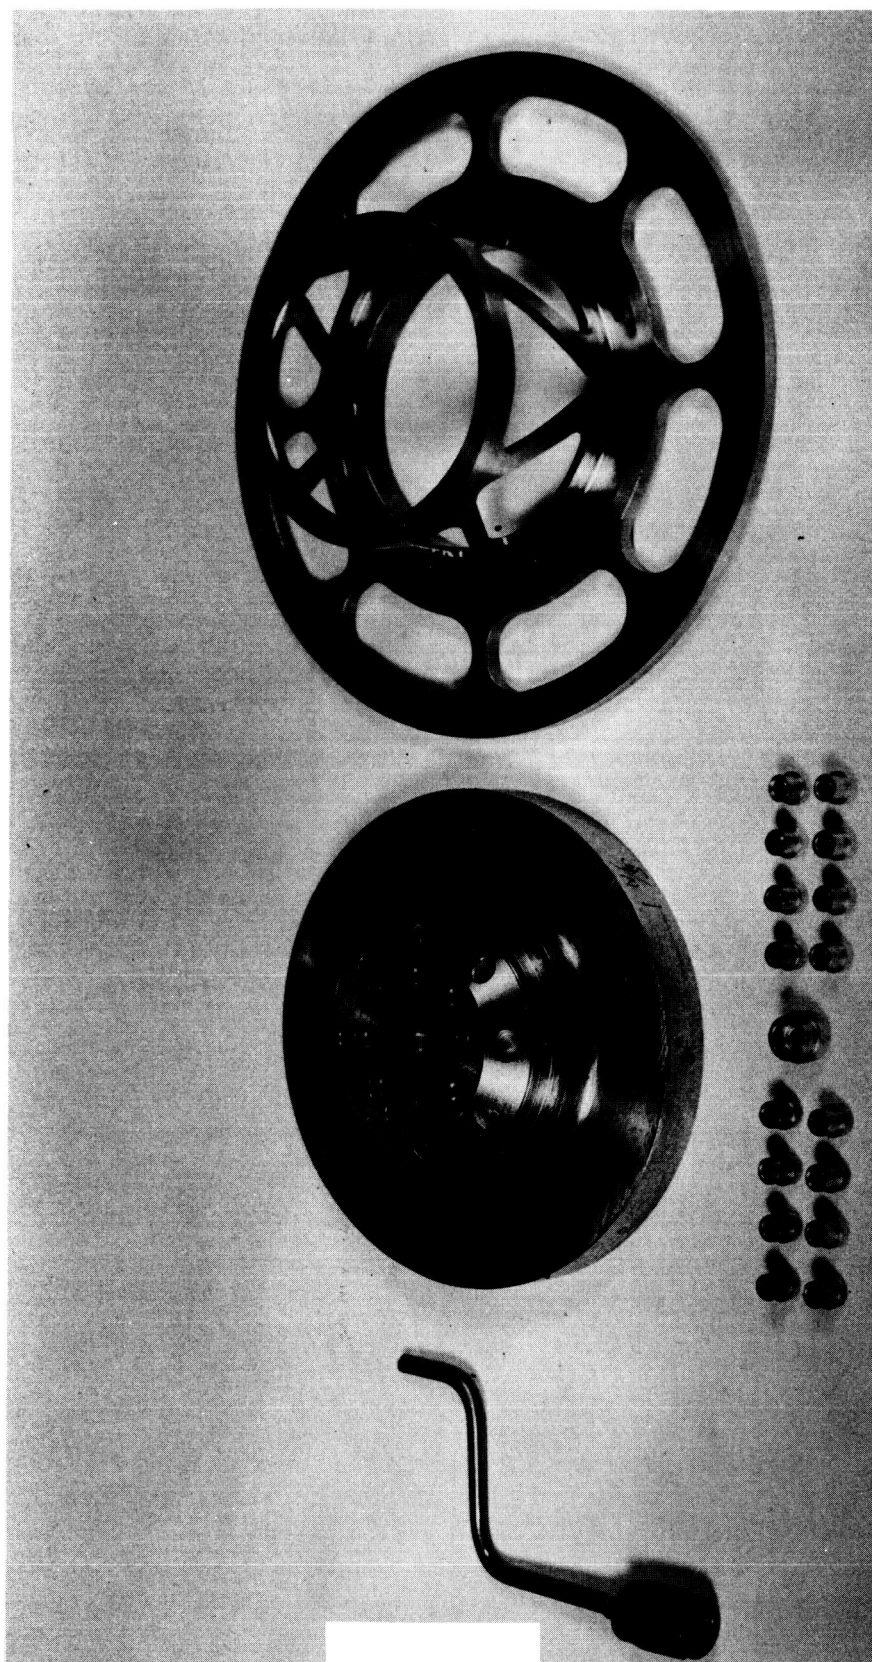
100-lb Injector Prior to Electron Beam Welding
